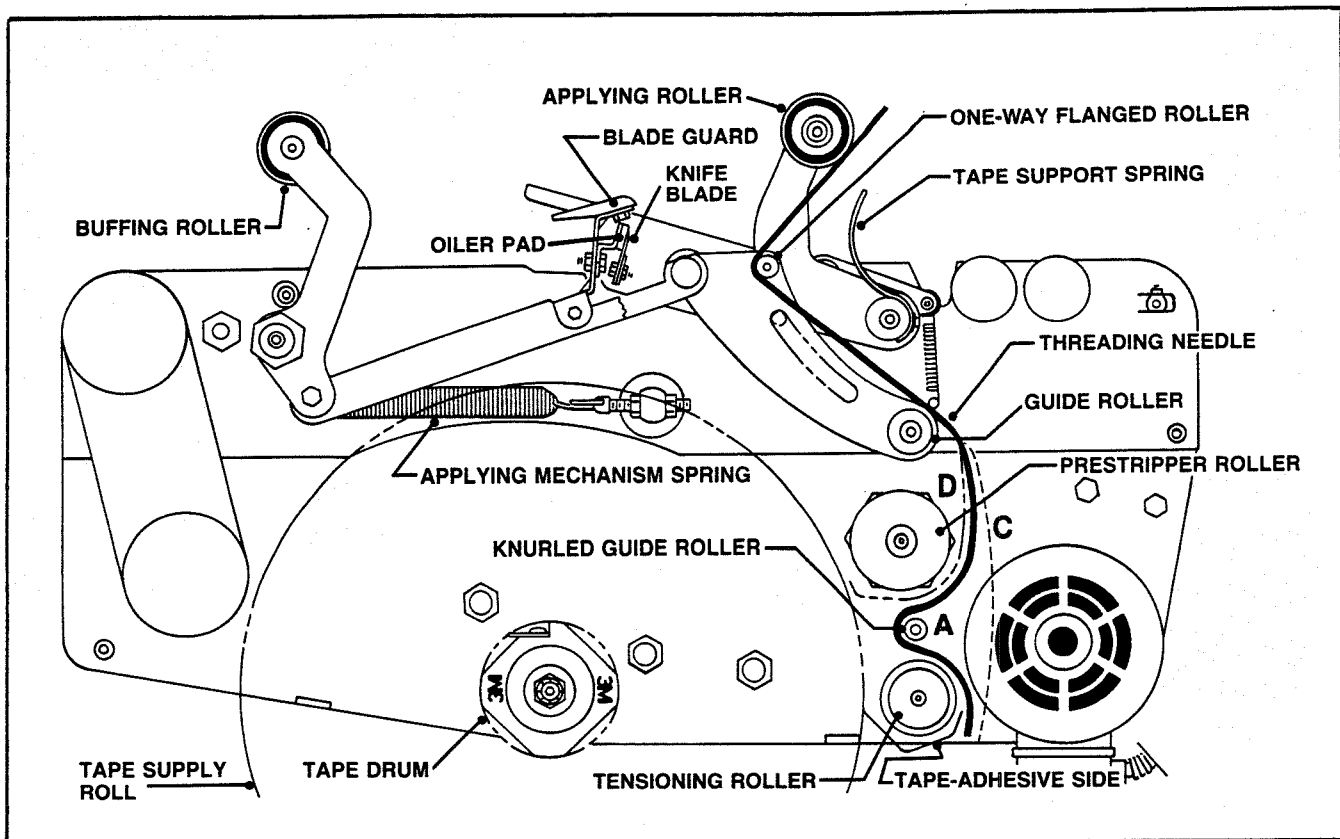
A Tape Threading Diagram - Bottom Taping Head - Left Side View
